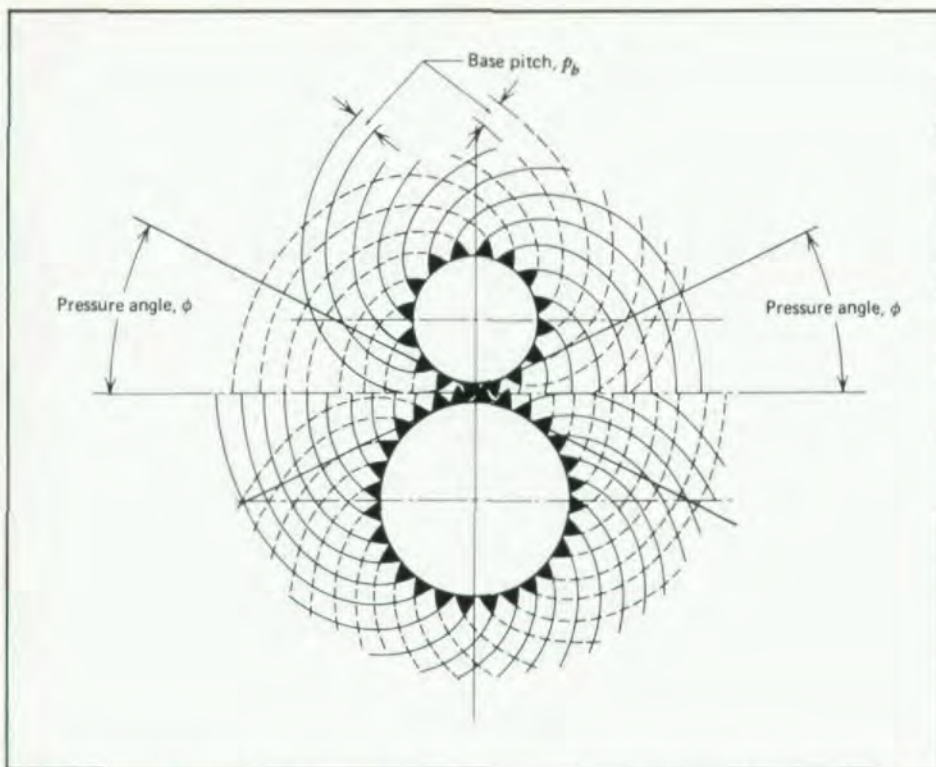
Involute gear teeth are generated by a series of symmetrical involutes oriented alternately in a clockwise and counterclockwise direction. For the two gears to mesh properly, they must have the same base pitch.
